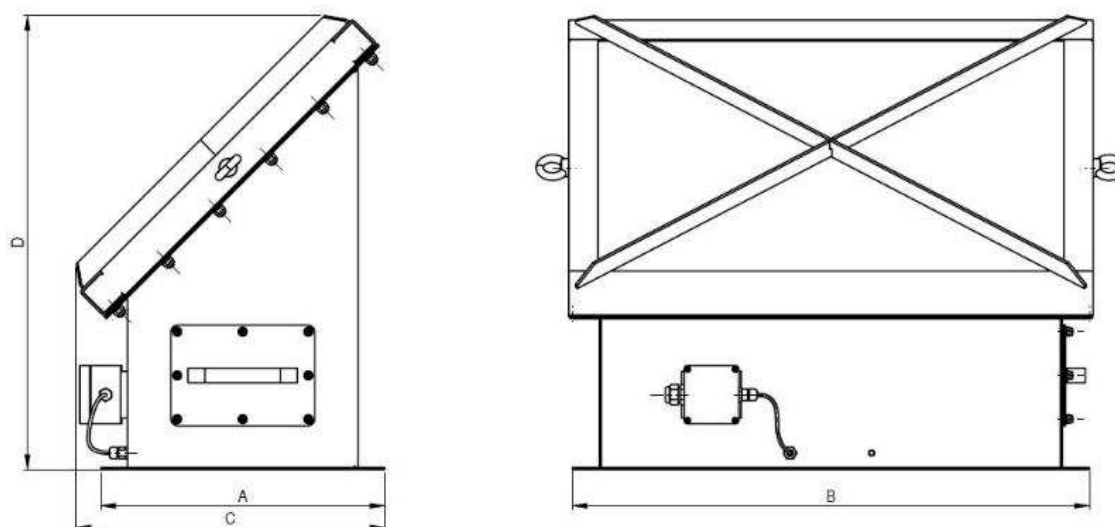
The Drawing of the Rectangular FLEX - Flat (F1 - F3)
